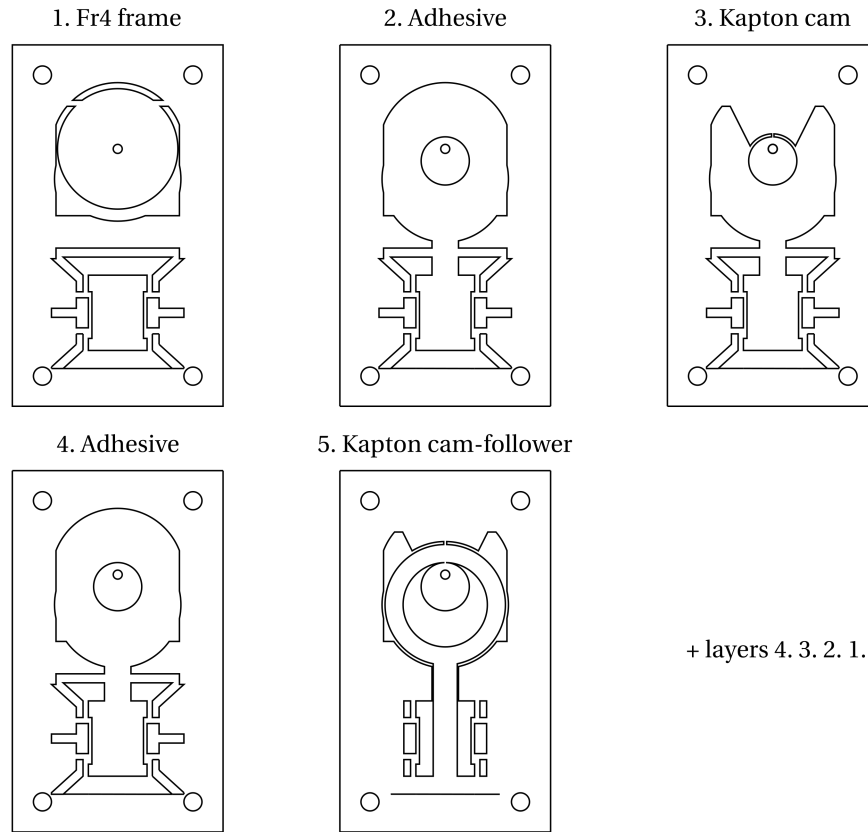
Cam-follower CAD design. This mechanism is composed of nine layers: two layers of Fr4 define the links; three layers of Kapton for the joints, cam, and slider; and six layers of adhesive. Stacking in order layers 1 to 9, heat pressing, and removing the outline and bridges gives the low-profile cam-follower mechanism.
